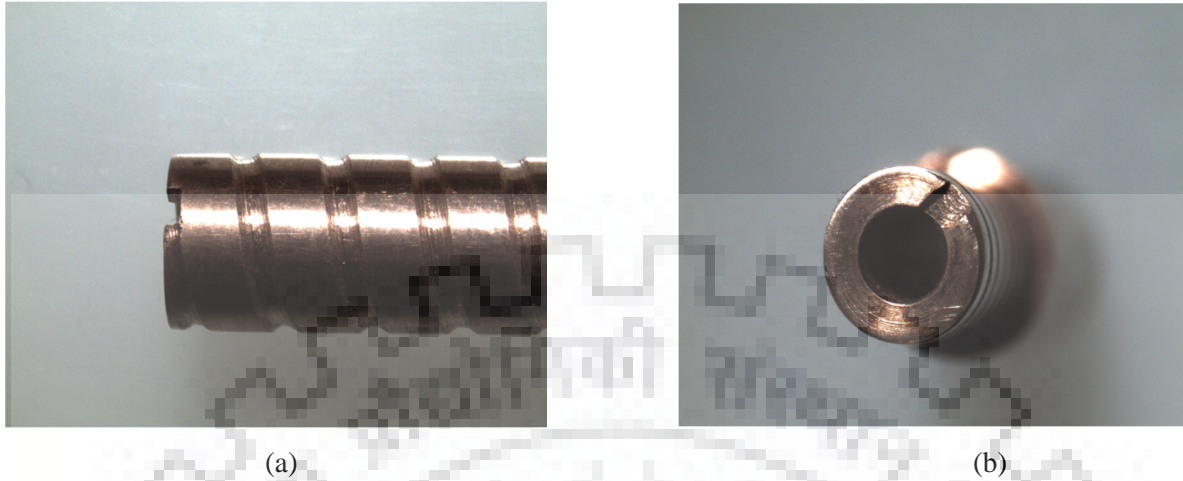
(a) Side view (b) Top view of tool with single start helical flutes
